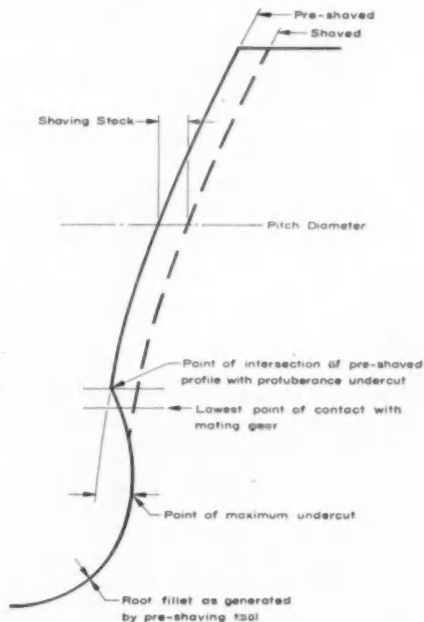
Typical gear fillet produced by a protuberance-type tool.
